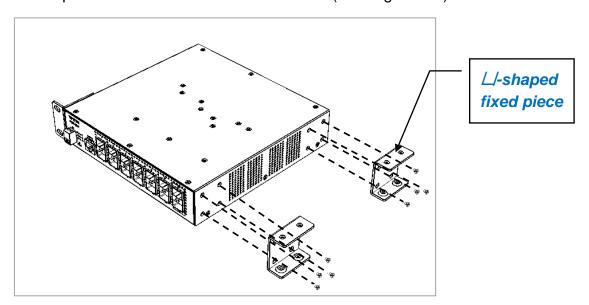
Install the ∐-shaped fixed pieces for two-switch mounting
